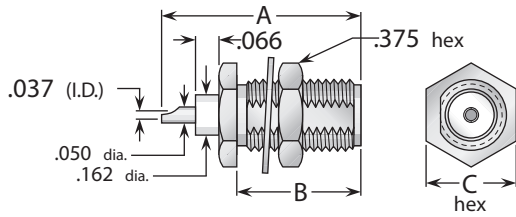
(Rear mount, solder pot contact, no mounting gasket)
